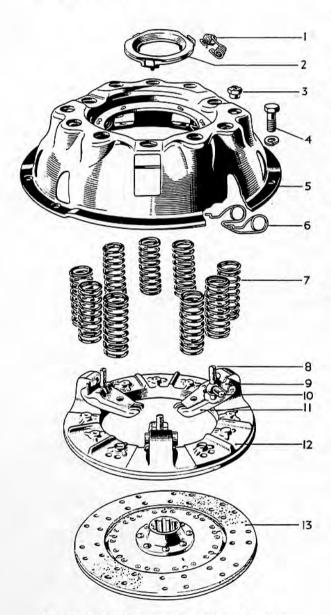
EXPLODED VIEW OF SINGLE CLUTCH
